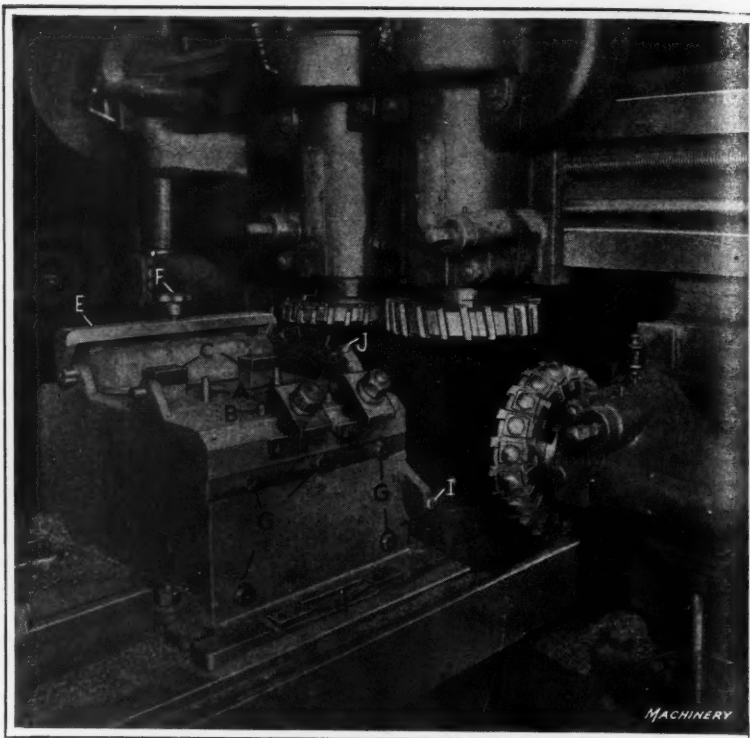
Arrangement of Cutters and Design of Work-holding Fixture used on Ingersoll Multiple-spindle Machine for milling Continental Cylinder Heads
